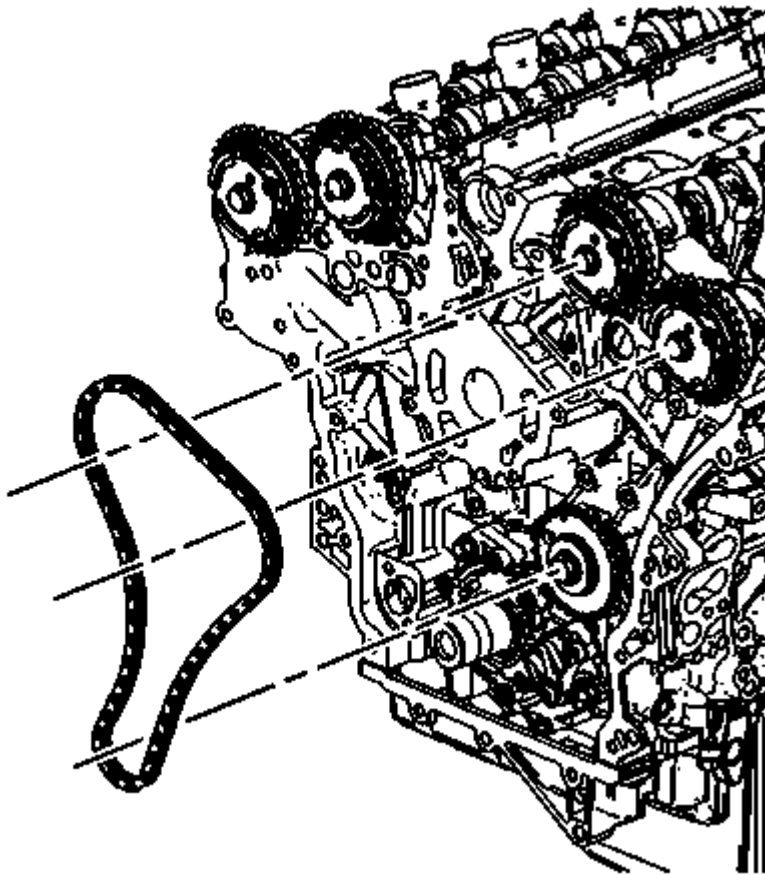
View Of Left Bank Secondary Camshaft Drive Chain
